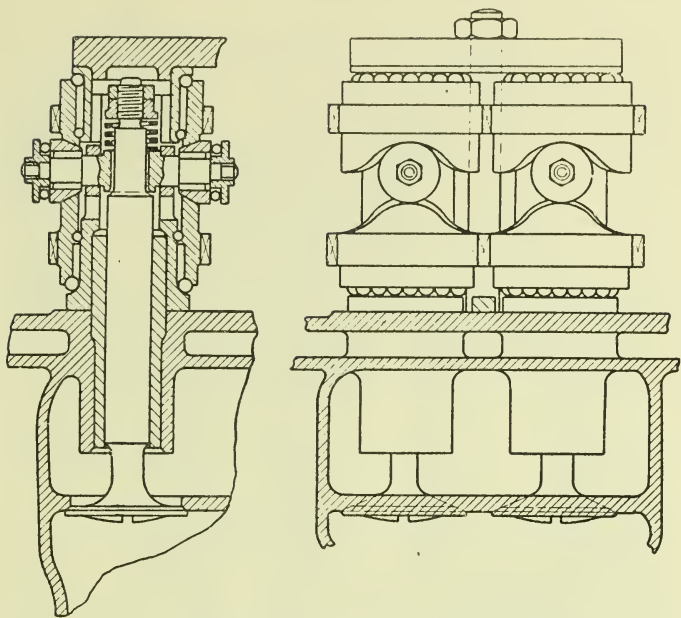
OVERHEAD CAM GEAR ON THE FIAT ENGINE
